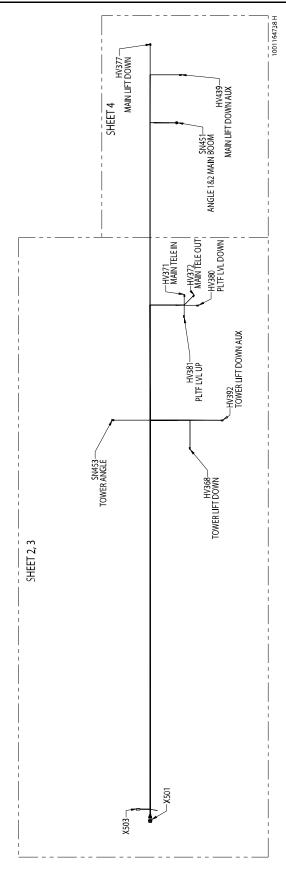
Tower Upright Valve Harness - Sheet 1 of 4
